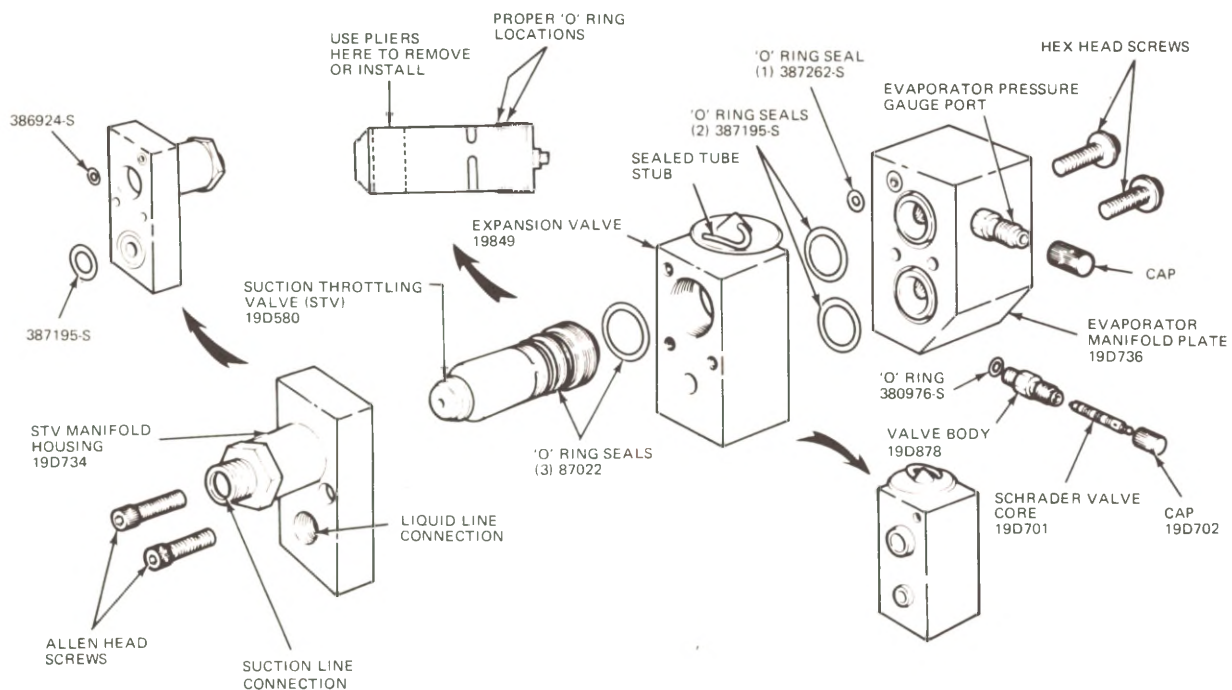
Combination Valve (TXV & STV) Ford
